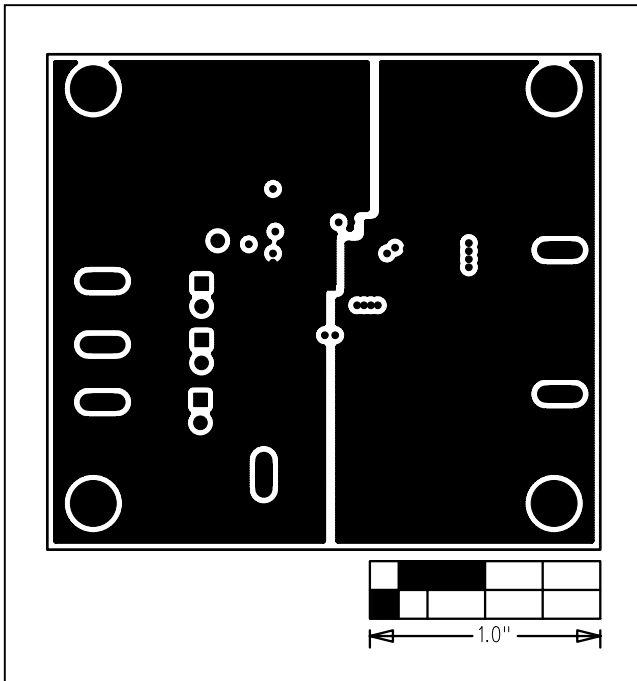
MAX15015A EV Kit PCB Layout—GND Layer 2
